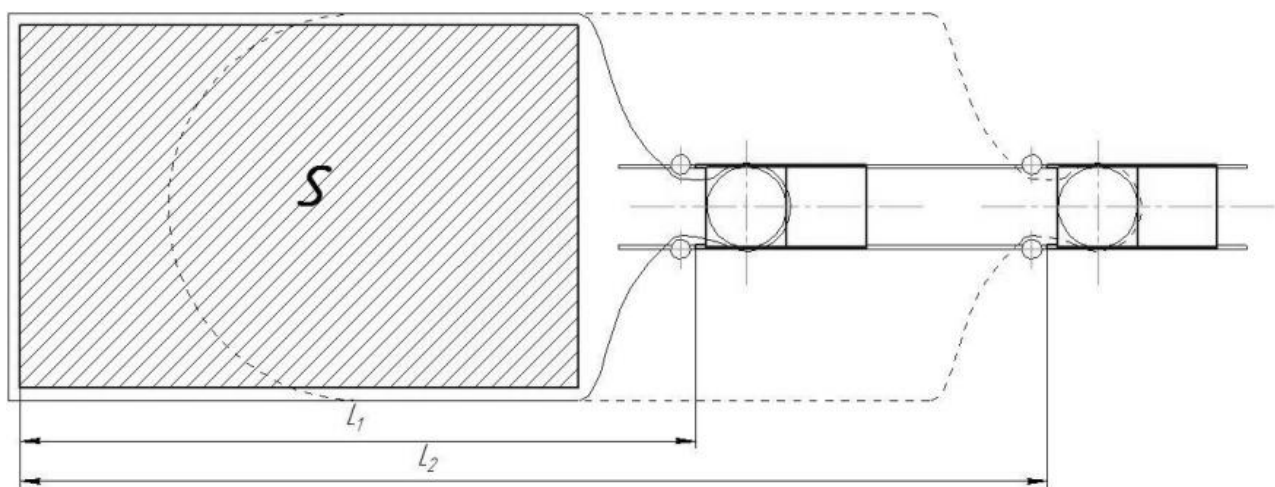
The scheme of the working face of the diamond wire saw (horizontal cutting)
